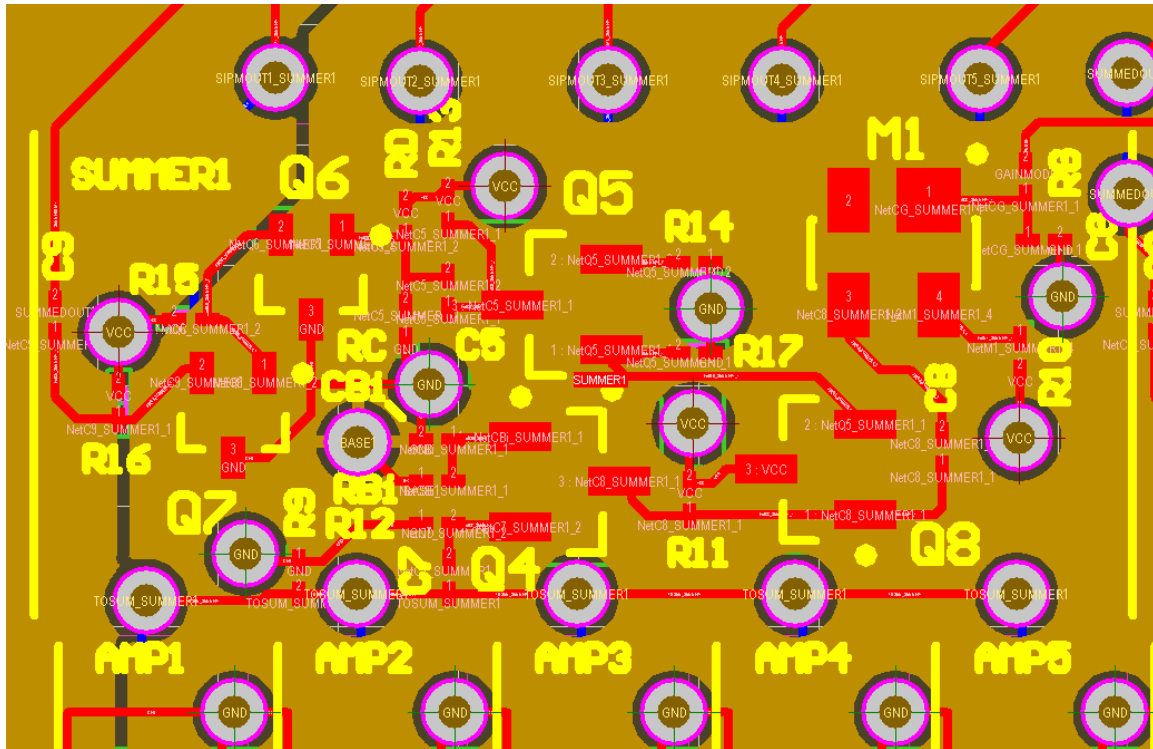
Close-up CAD drawing of summing circuit SUMMER1 on the amplifier board
